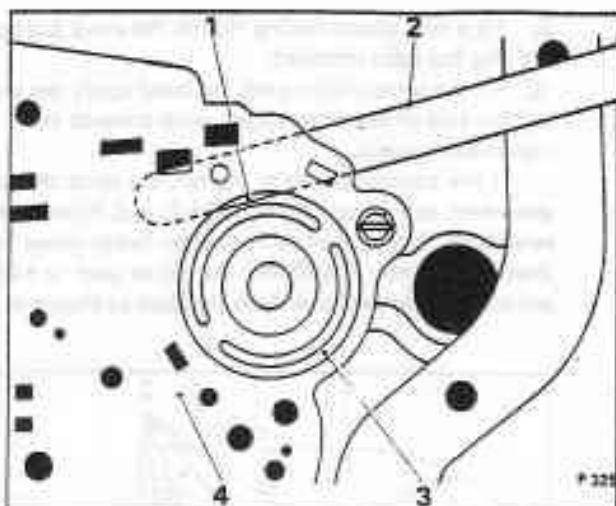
Method of temporarily holding front servo piston in position (Transmission in car)
